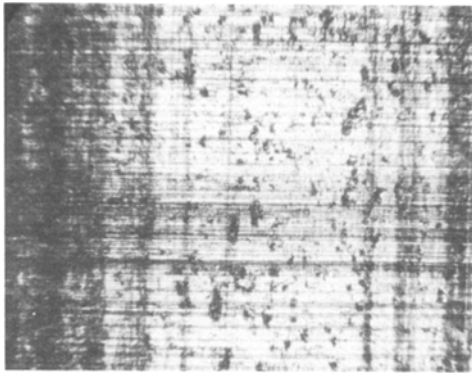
Optical micrograph of machined surface. Cutting speed  $12.5 \text{ ft min}^{-1}$  ( $6.35 \text{ cm sec}^{-1}$ ); wearland length  $0.000 \text{ in.}$ ; rake angle  $25^\circ$ ; dry cutting.  $\times 25$
